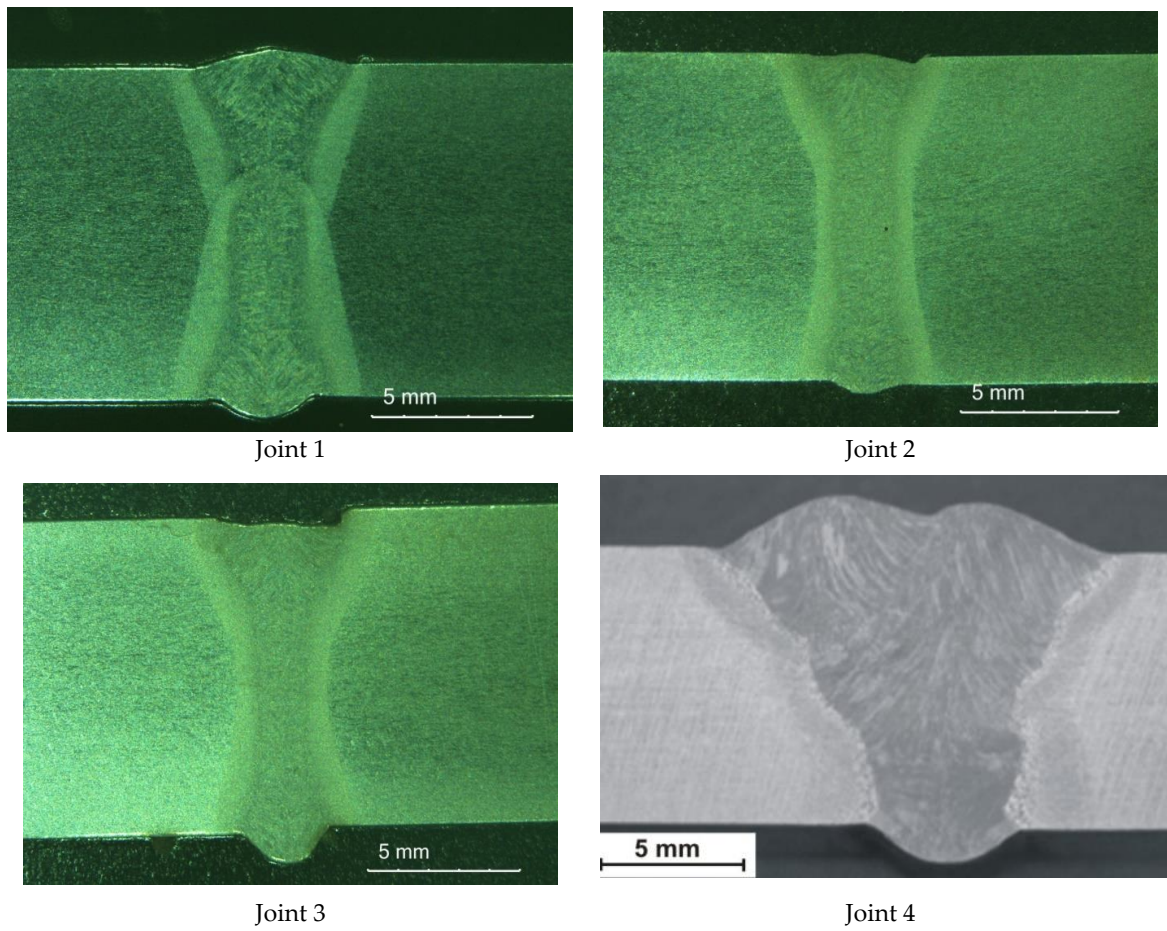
View of the macrostructures of the laser and MAG S700MC steel welded joints.
